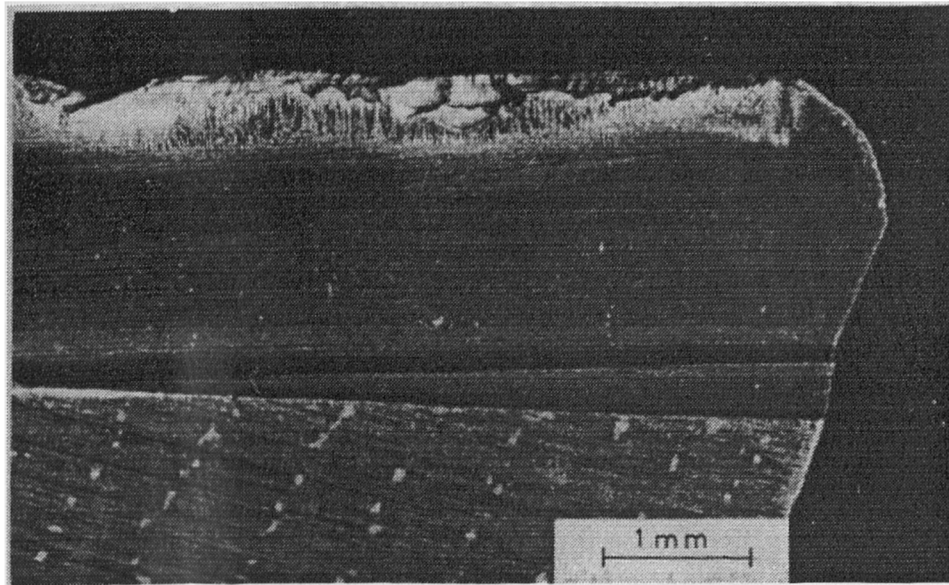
Edge chipping of carbide tool after cutting steel at low speed with a built-up edge [Trent (1991)].
